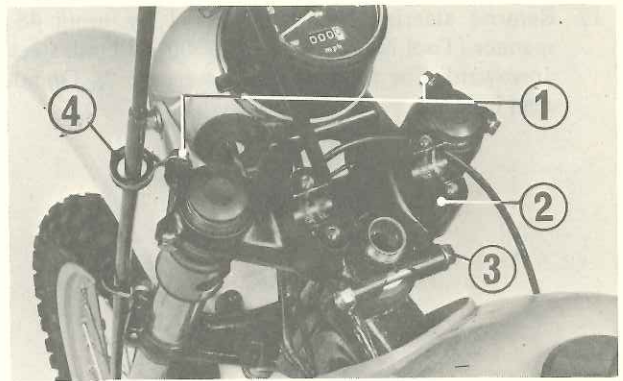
(1) Upper tightening bolts (2) Fork top bridge (3) Stem tightening bolt (4) Brake cable guide
